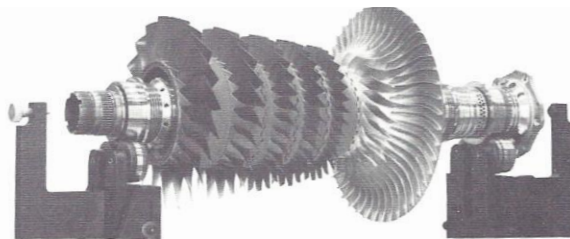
Axial-centrifugal compressor of the General Electric T700 engine. (Courtesy GE Aircraft Engines.)
